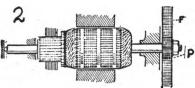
Gear Meshing of Rushmore Starting Motor.
